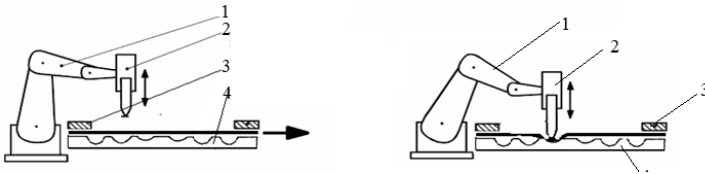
Incremental hammering achieved by an industrial robot, [26]: 1 - Industrial robot; 2 – Tool holder; 3 - Clamping device; 4 - Support frame
